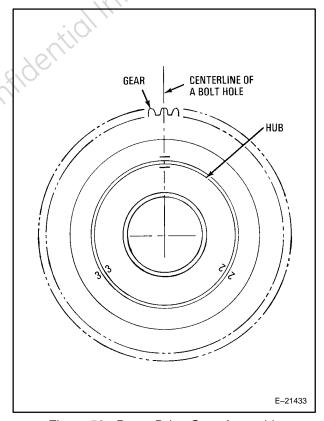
Pump Drive Gear Assembly Match–Mark Numbers.
